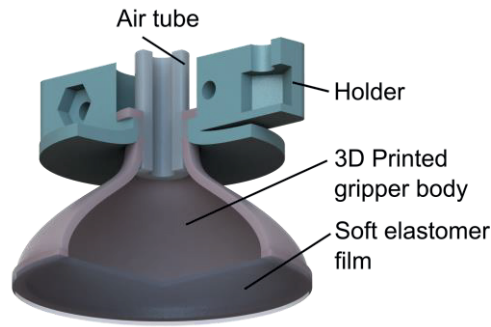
Schematic of the 3D printed gripper, including a soft 3D printed gripper body, a soft and thin elastomer film, an air tube and a rigid 3D printed holder.
